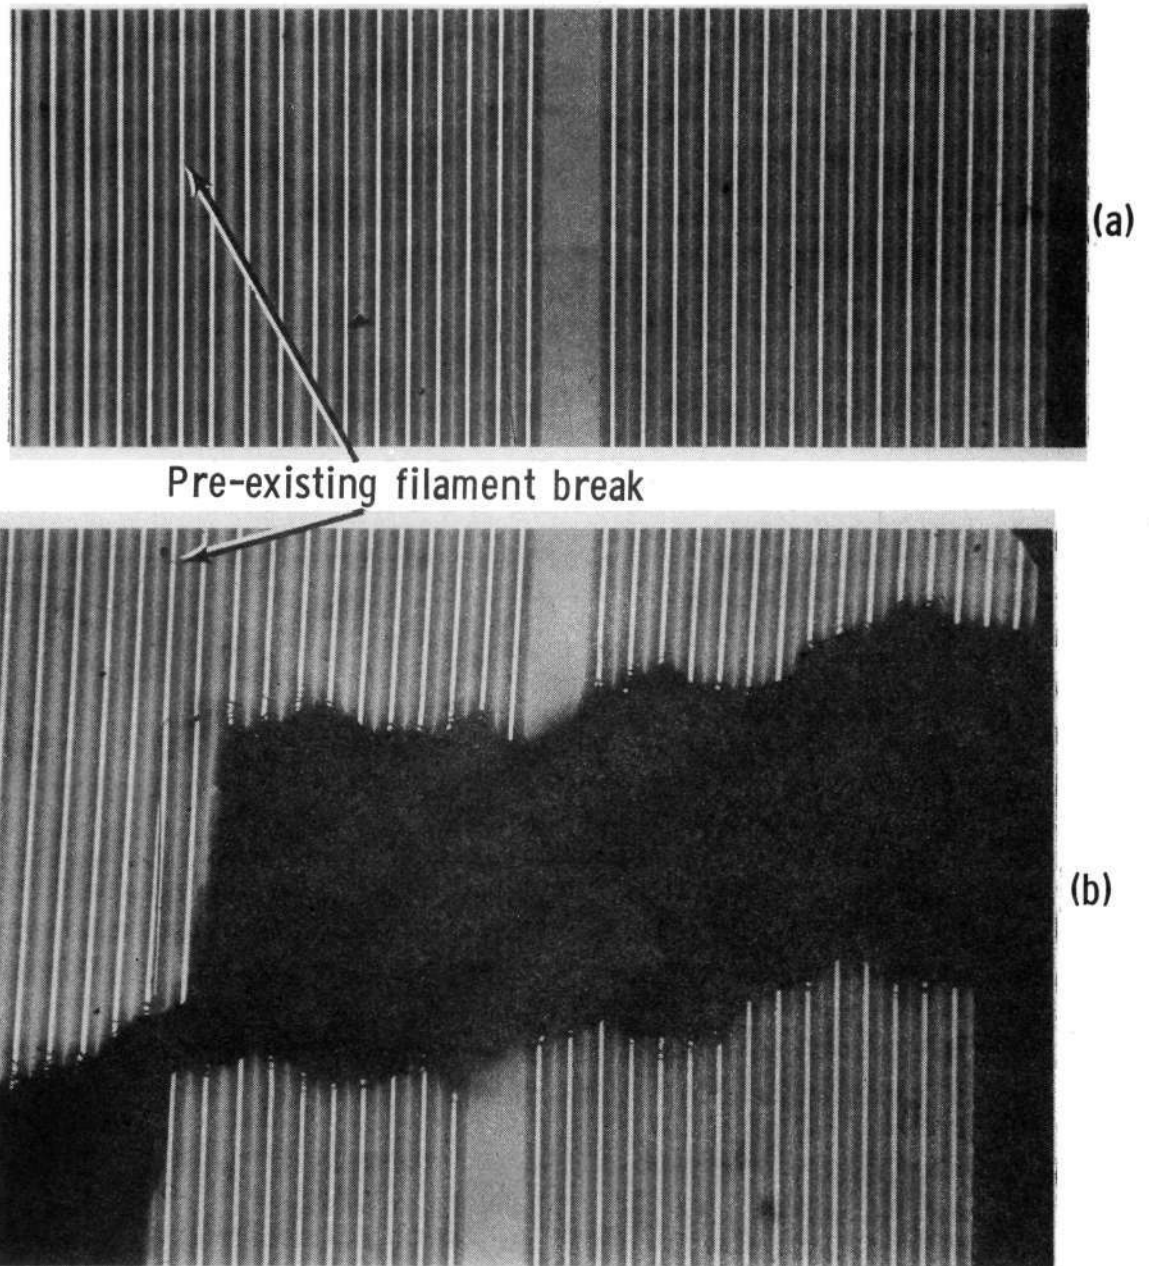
Fractoradiographs of monolayer B-Al composite showing role of pre-existing filament break in promoting development of axial fracture, 0.6 mil core diameter.
